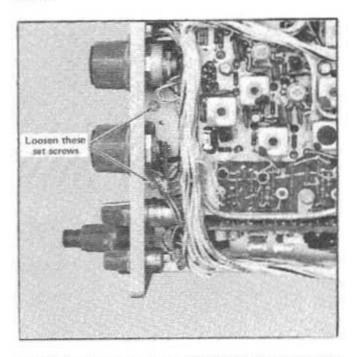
Location of the set screws holding the RF casting to the front panel.
